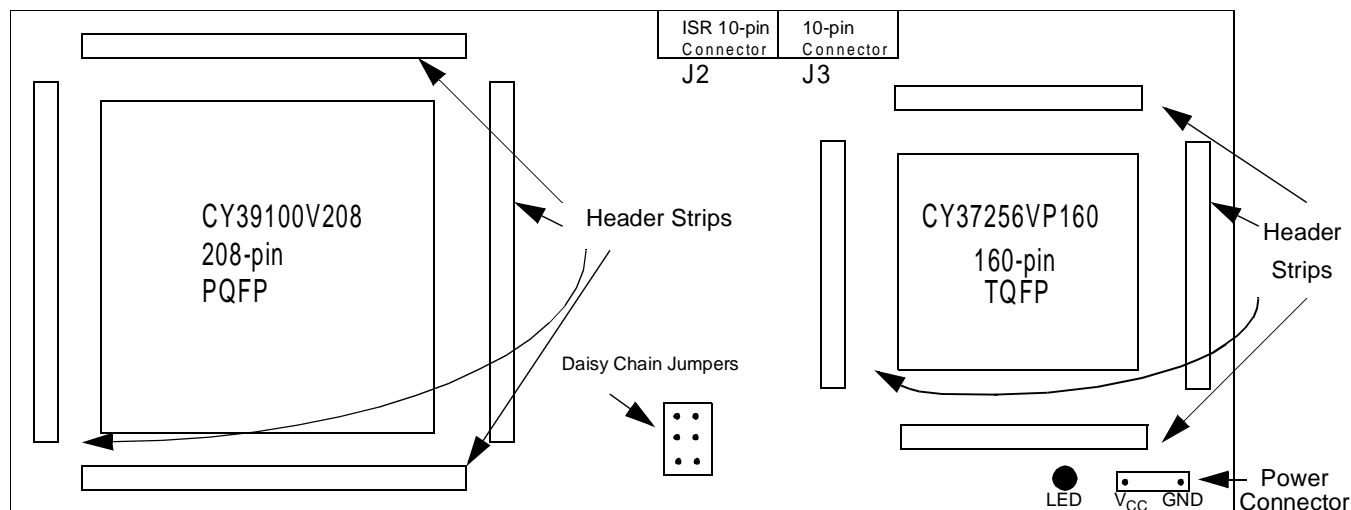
Delta39K™\Ultra37000™ Prototype Board.
